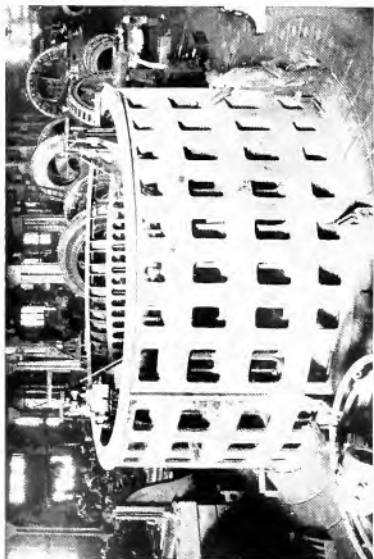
Stator of 3250 kv.-a. Generator on 60-ft. Boring Mill. Upper Flange Being Machined by One Tool While Lower Flange is Being Machined by Another Tool
